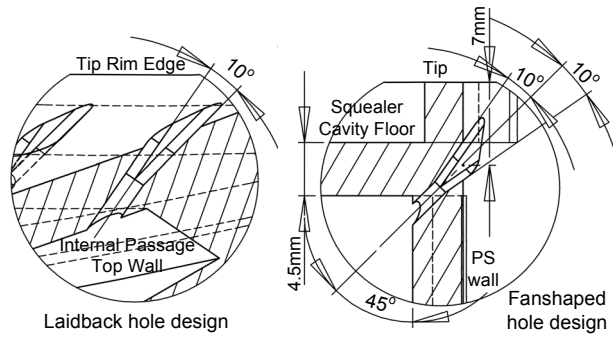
Detail geometry of a PS shaped hole for blade 1
